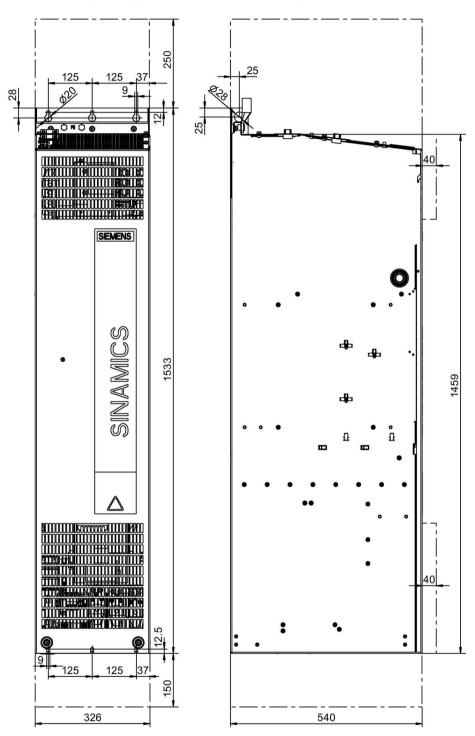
Dimension drawing Active Line Module, frame size GX Front view, side view
